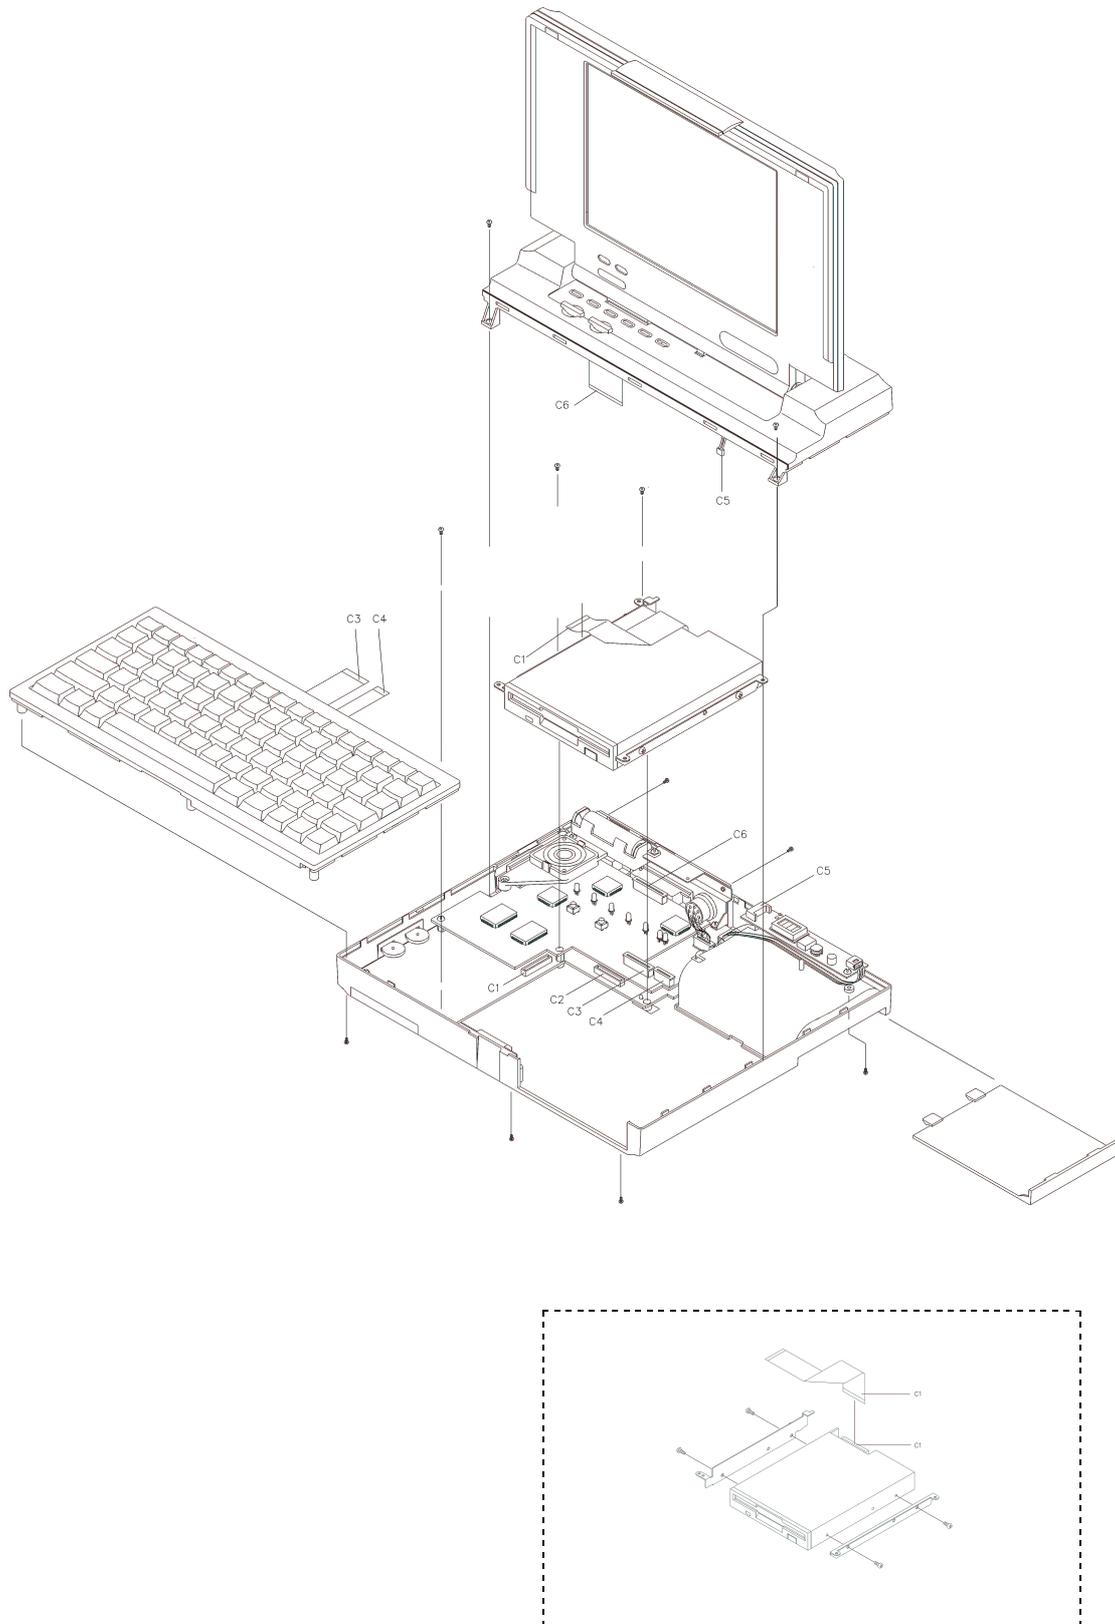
Floppy Disk Drive Disassembly/Reassembly
